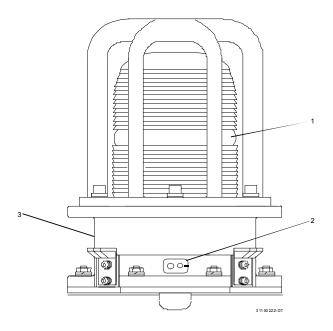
Kill Status Indicator (KSI) Assembly.
